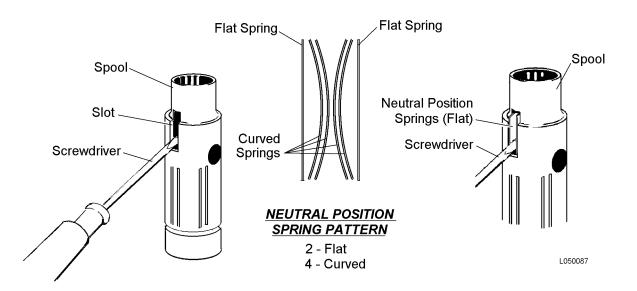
SPOOL AND SLEEVE ASSEMBLY
